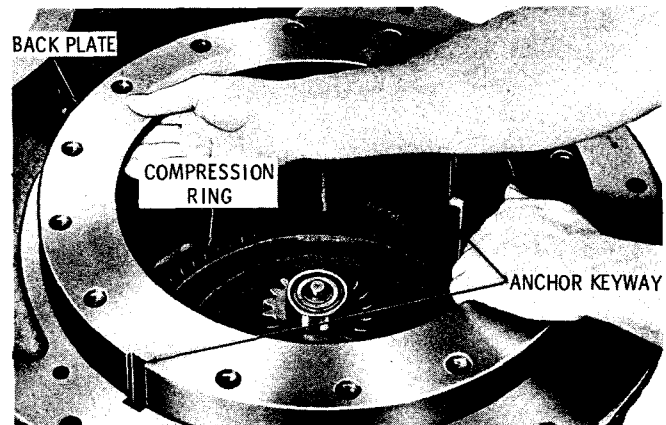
Installing intermediate-range clutch back plate S1659
